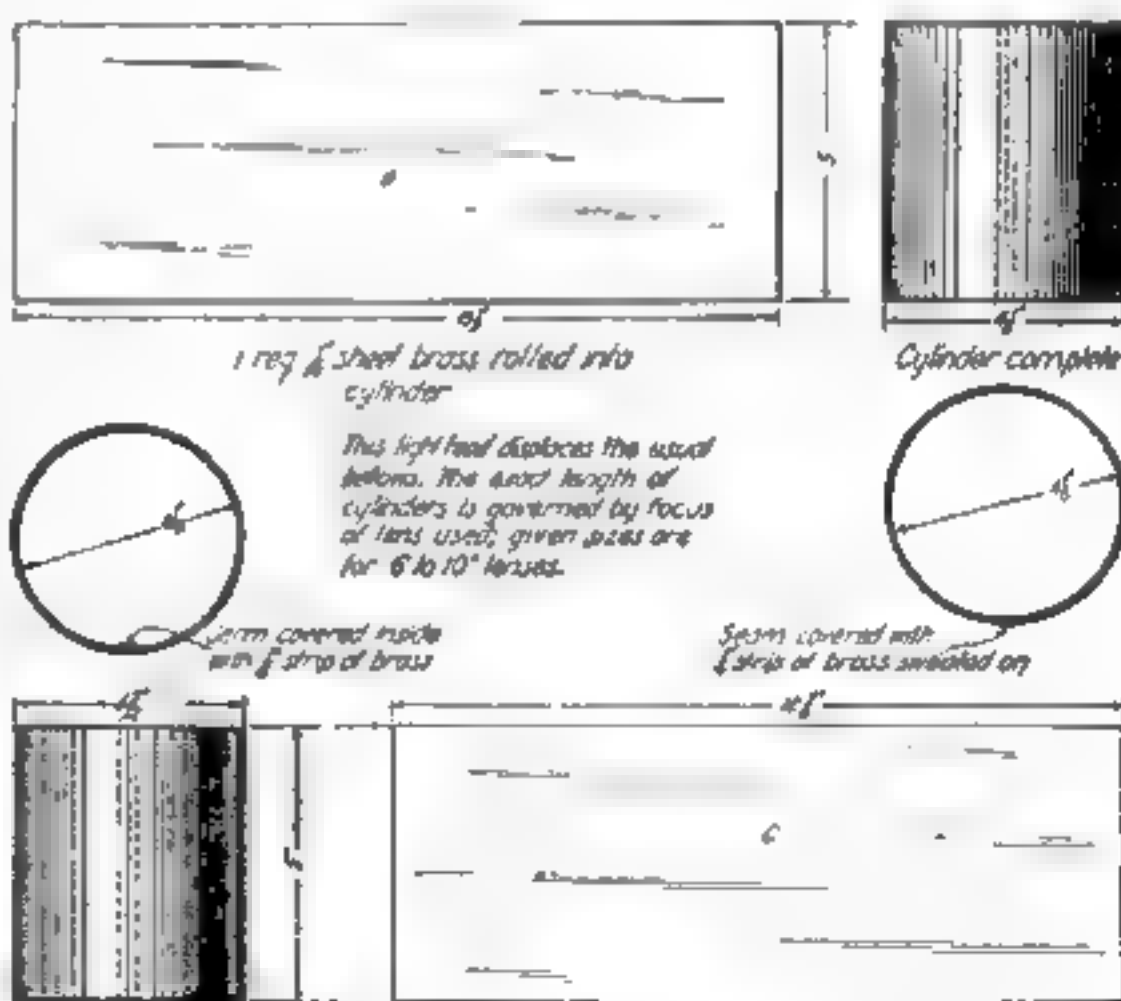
The telescoping cylinders made of thin sheet brass accurately cut and shaped with a tinner's roll
